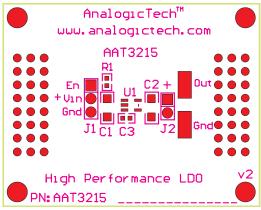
Evaluation Board Top Side Silk Screen Layout / Assembly Drawing.
